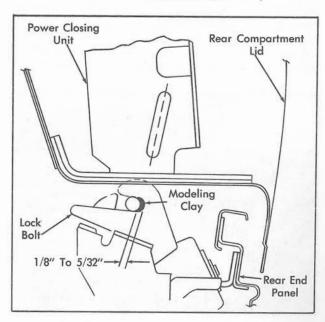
Checking Engagement of Lock and Power Closing Unit
